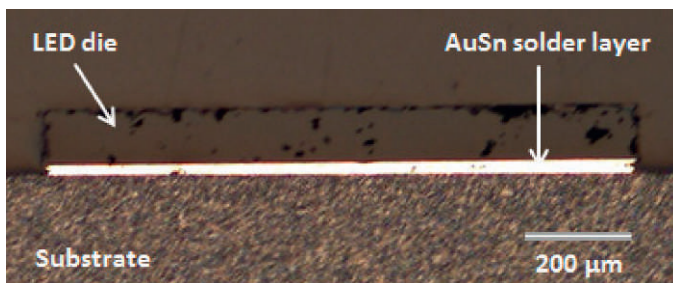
Cross sectional view of a AuSn soldered LED chip.
